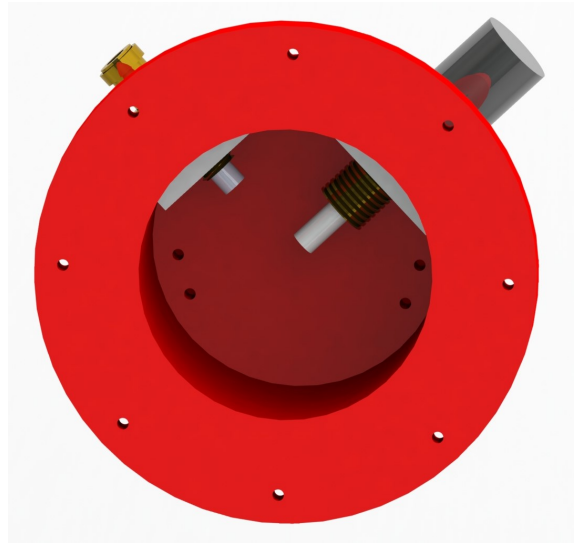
Interior of the Endcap, with the SEACON connectors and supporting 3D-printed PLA surfaces
